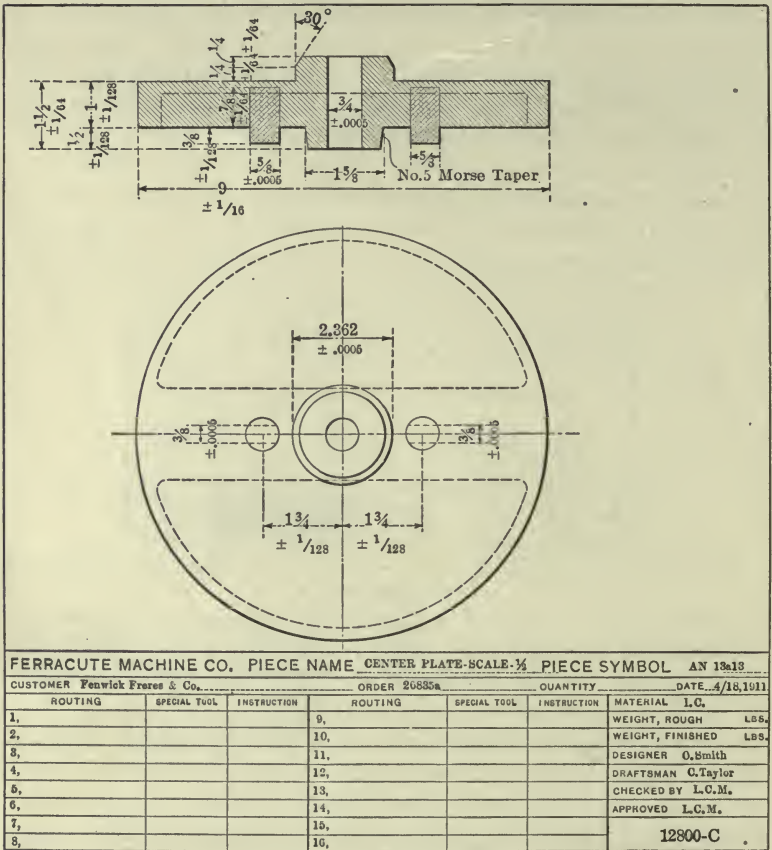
Shop blue print specifying limits of accuracy. Red cross-section lines as well as black border and printed matter at bottom of sheet are printed on the standard size tracing sheets.
